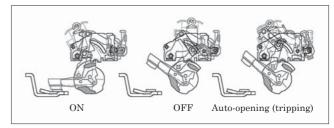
Example analysis of contact opening and closing mechanism used in molded-case circuit breakers
